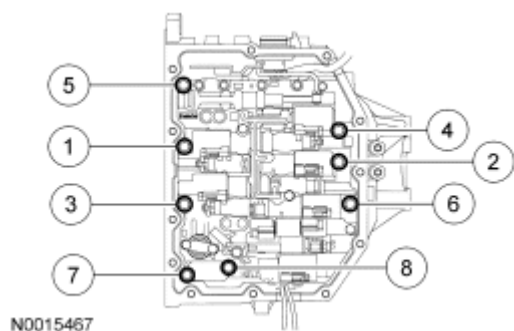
Identifying Main Control Valve Body Bolts Sequence
